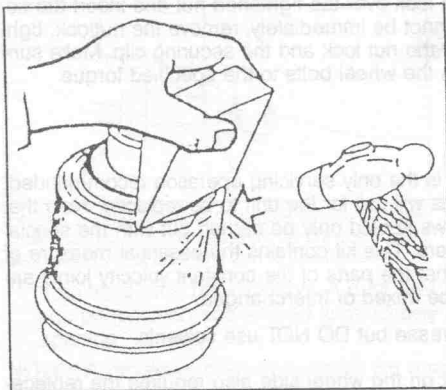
Securing the joint housing cover to the joint housing.
